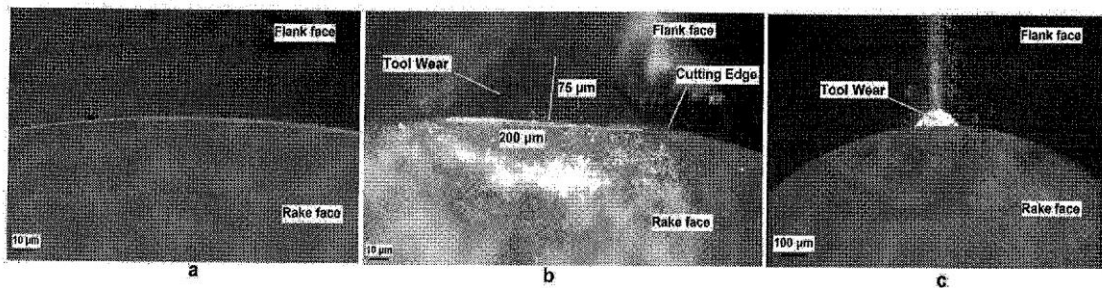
from [18] Tool bit a) before machining b) after machining c) after machining at lower magnification.
